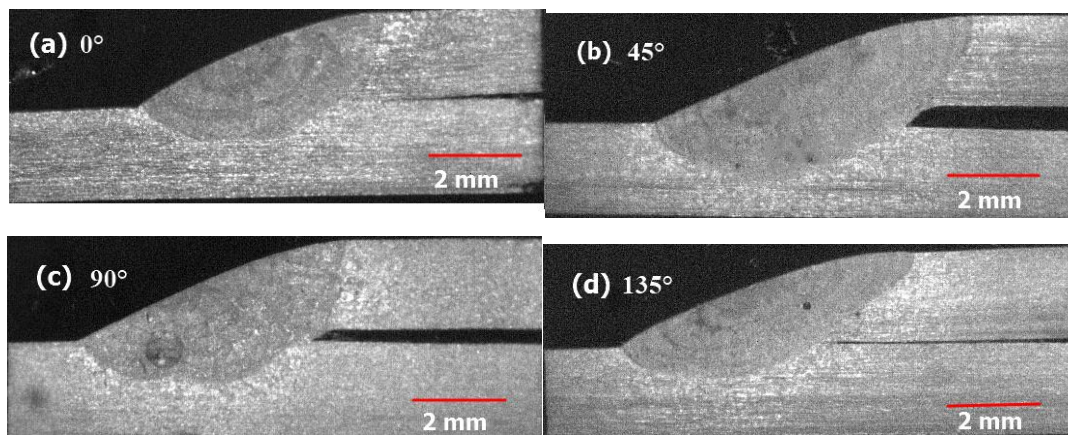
Cross sections of weld bead at different welding position from 0–180°. (a) 0° welding position, (b) 45° welding position, (c) 90° welding position, (d) 135° welding position.
